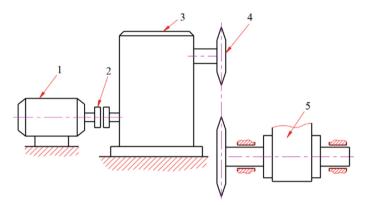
Schema of a mechanical drive system: (1) Motor; (2) Coupling; (3) Gearbox; (4) Chain drive; (5) Belt conveyor
